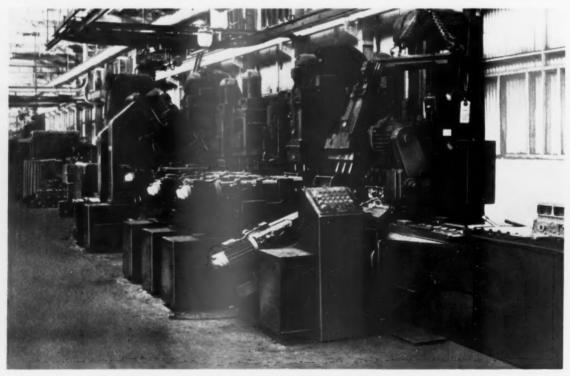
12-station in-line transfer machine with drilling, reaming, milling and tapping heads
